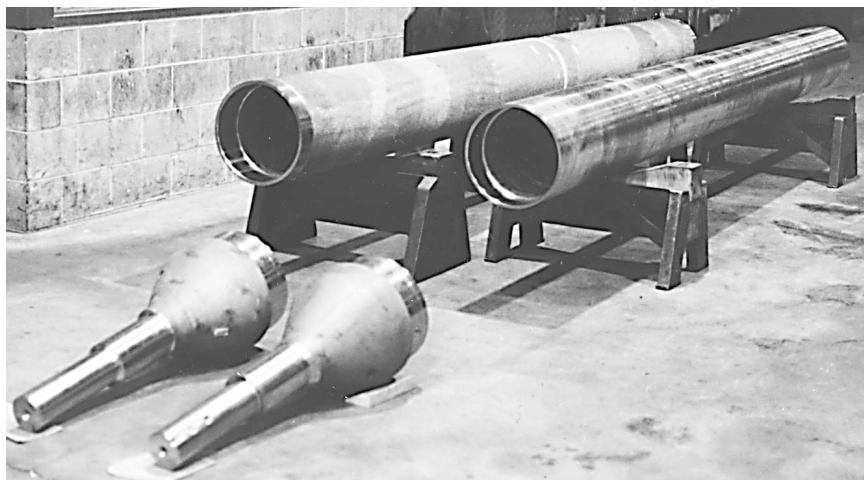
Cast and welded Ni_3Al transfer roll (for installation at Bethlehem Steel, Chesterton, Indiana). The roll was cast by Sandusky International (Sandusky, Ohio), and the trunnions were cast by Alloy Engineering and Casting Company (Champaign, Illinois). Source: ORNL
